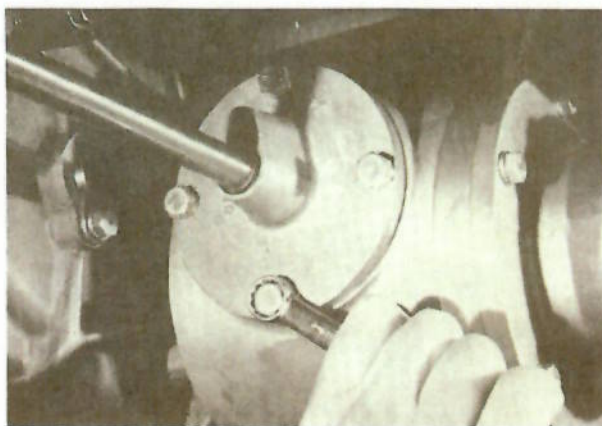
FASTENING THE SHIFT COVER PLATE TO THE OVERDRIVE FORWARD HOUSING.
